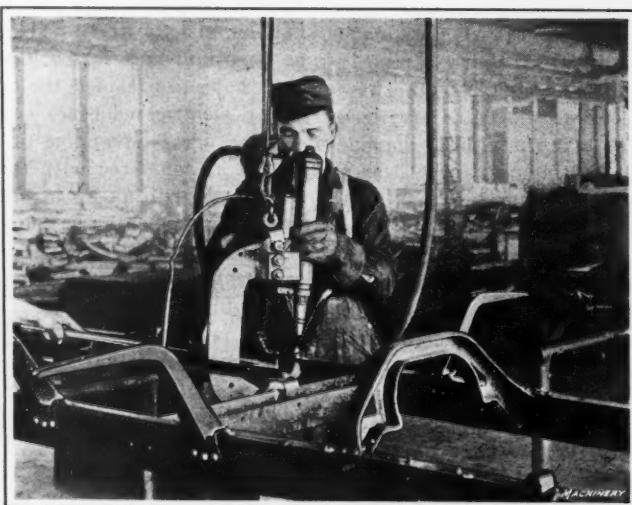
Riveting Automobile Frame with Yoke Riveter made by Chicago Pneumatic Tool Co.
